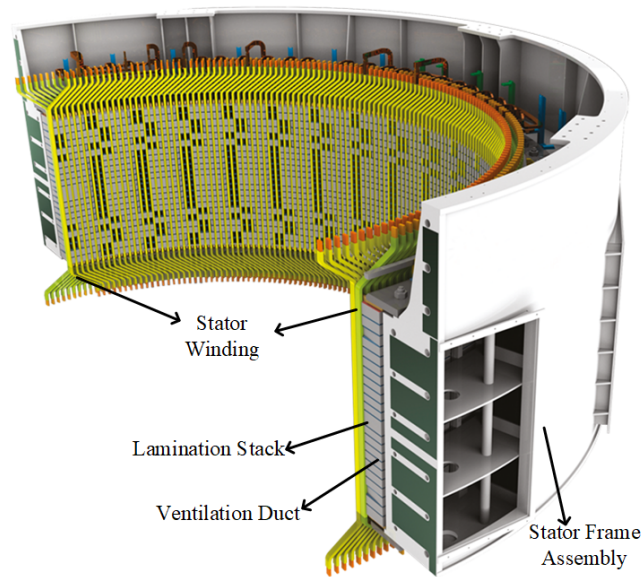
Stator assembly of a hydro generator, adapted from [13].
